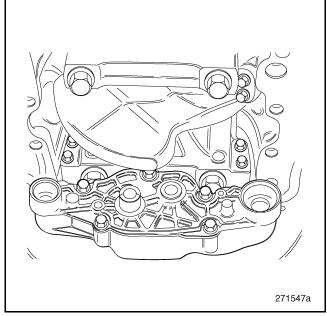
Oil Pump (Installed on No. 7 Bearing Cap)
